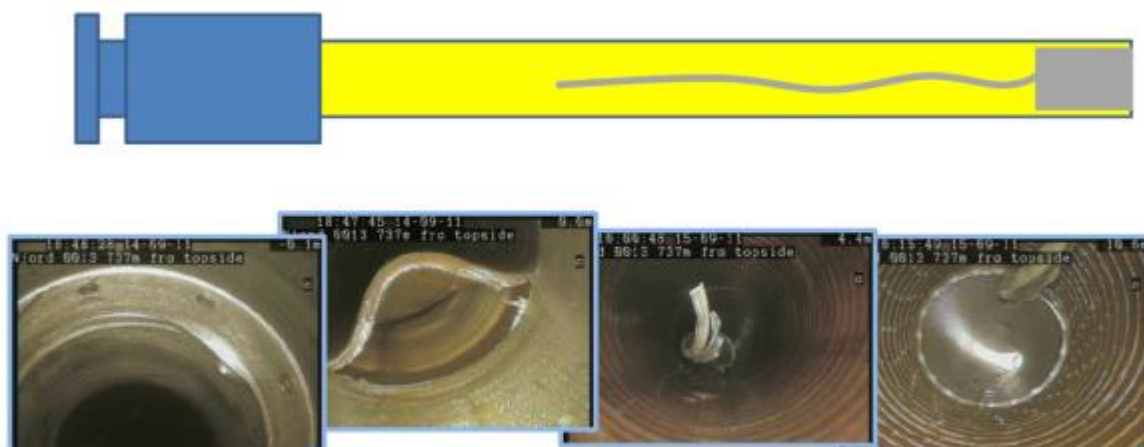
Internal inspection of the top of a riser after carcass pull-out, ref [6]
